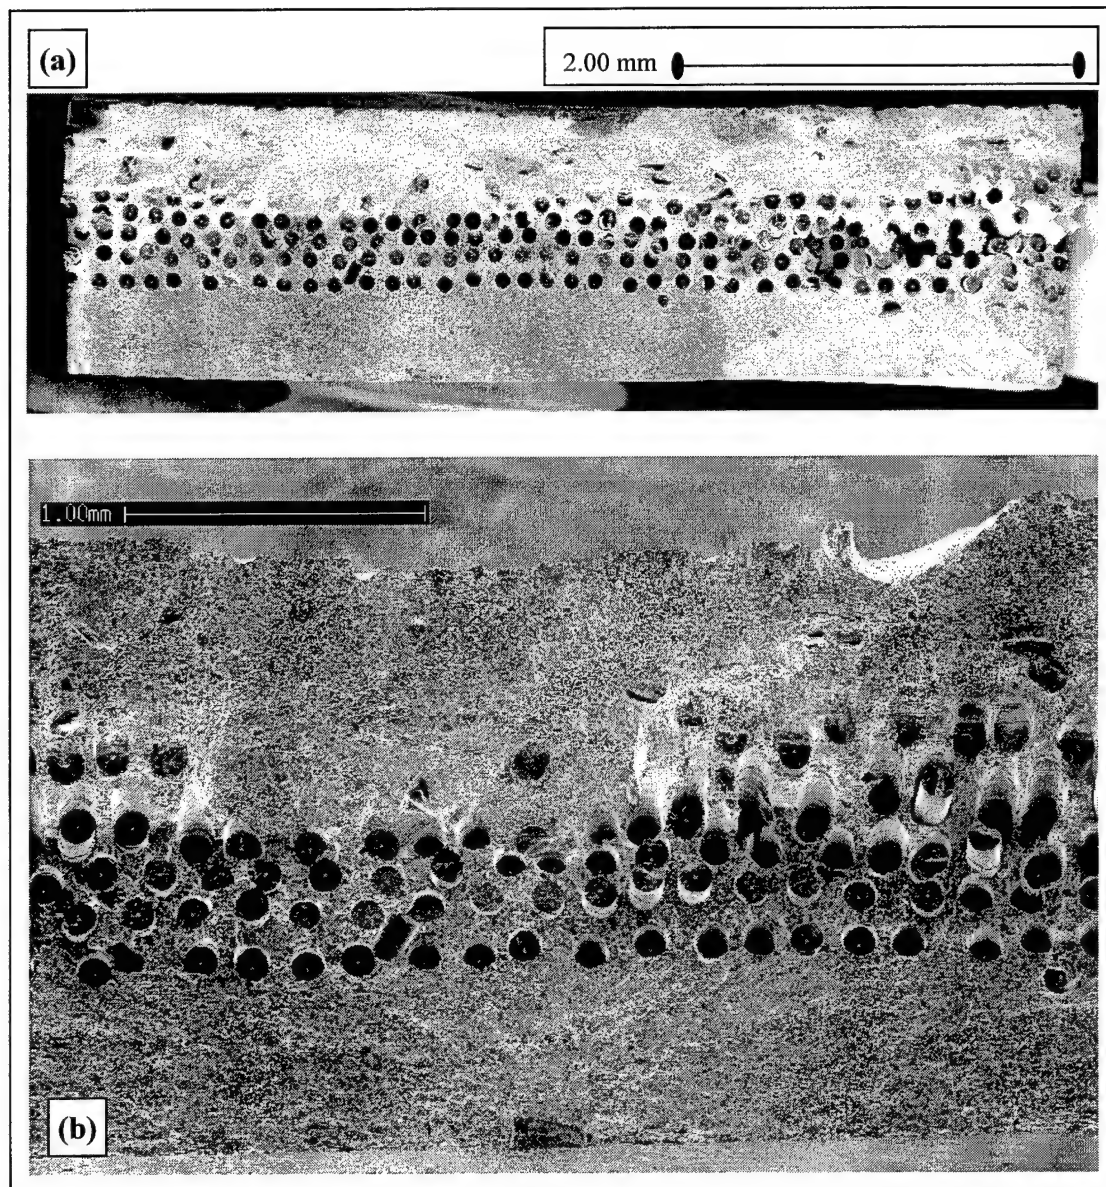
Specimen 200 (4:1 taper) fracture surface (a) complete view (b) tilted view of the same surface, centered on flaw, to show the terrain features of the fracture
